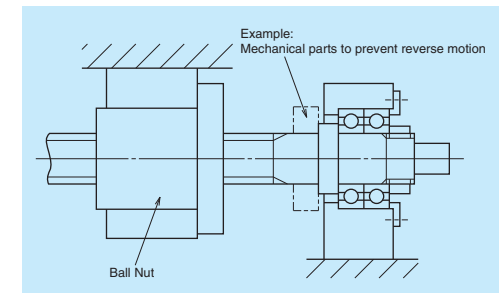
Nut and ball screw are required to be separated when installing in this structure.
